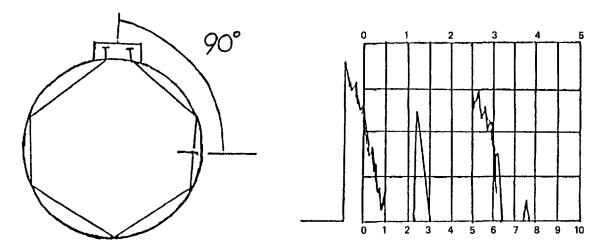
Location of surface flaw on rod using twin-angle probe.
